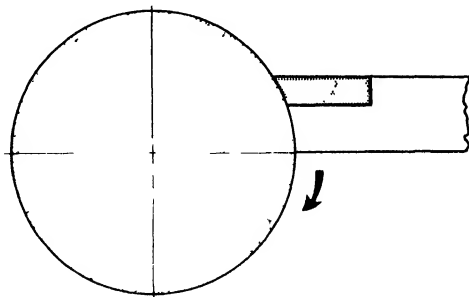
Grinding the Tool on the Straight Wheel May Make the Point Concave
